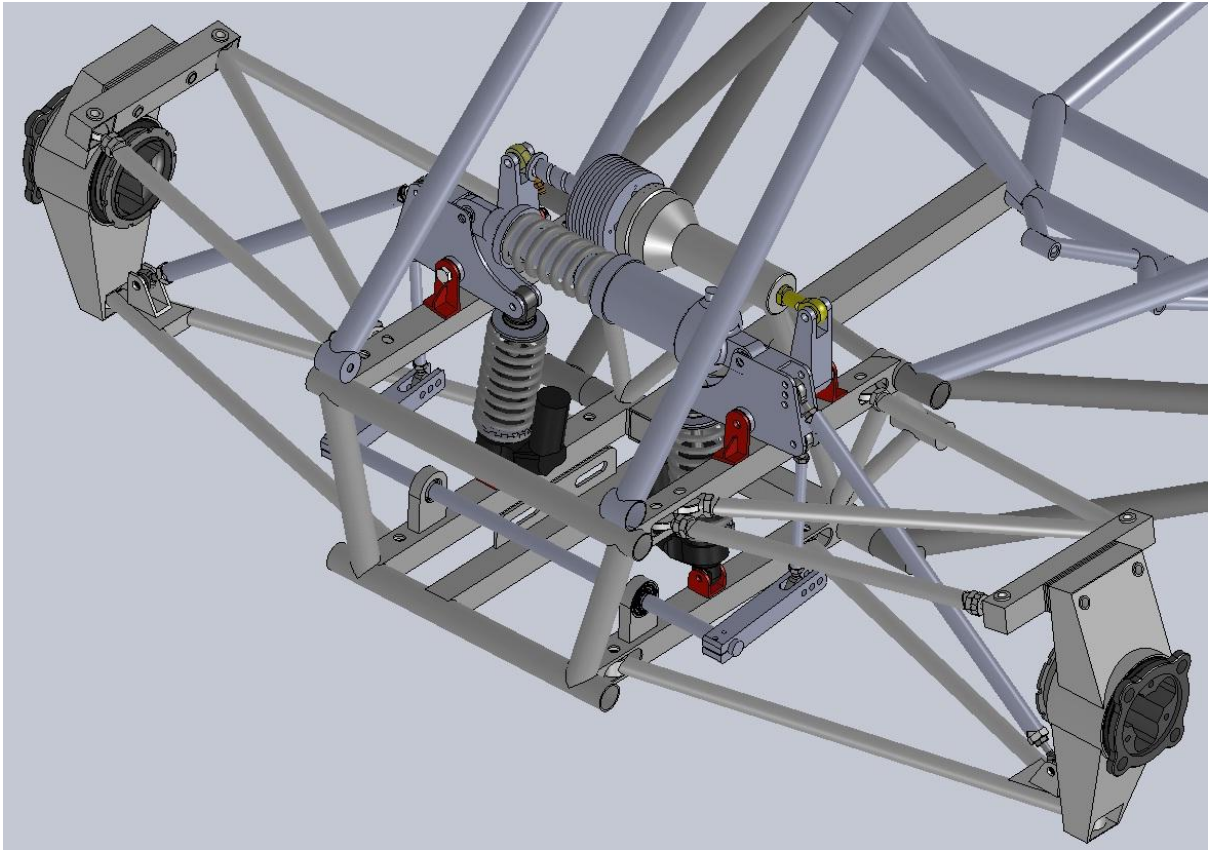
3D CAD detailed design of the new rear suspension incorporating inverter
